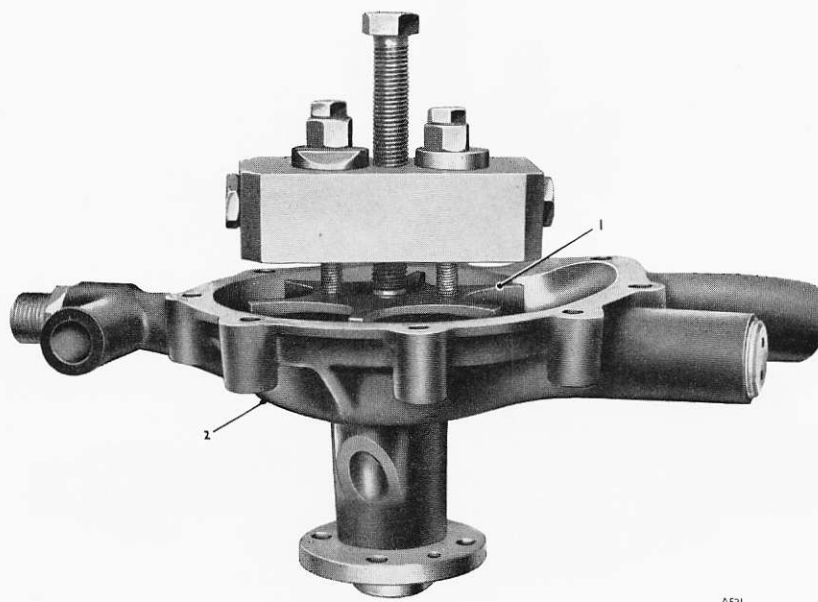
Extraction of impeller — S1 cars (Special tool RH.570)
